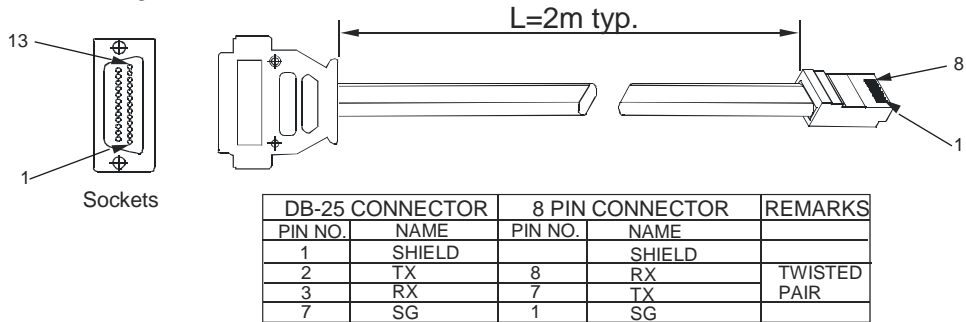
RS-232 cable with DB25 connector (P/N: GEN/232-25)
